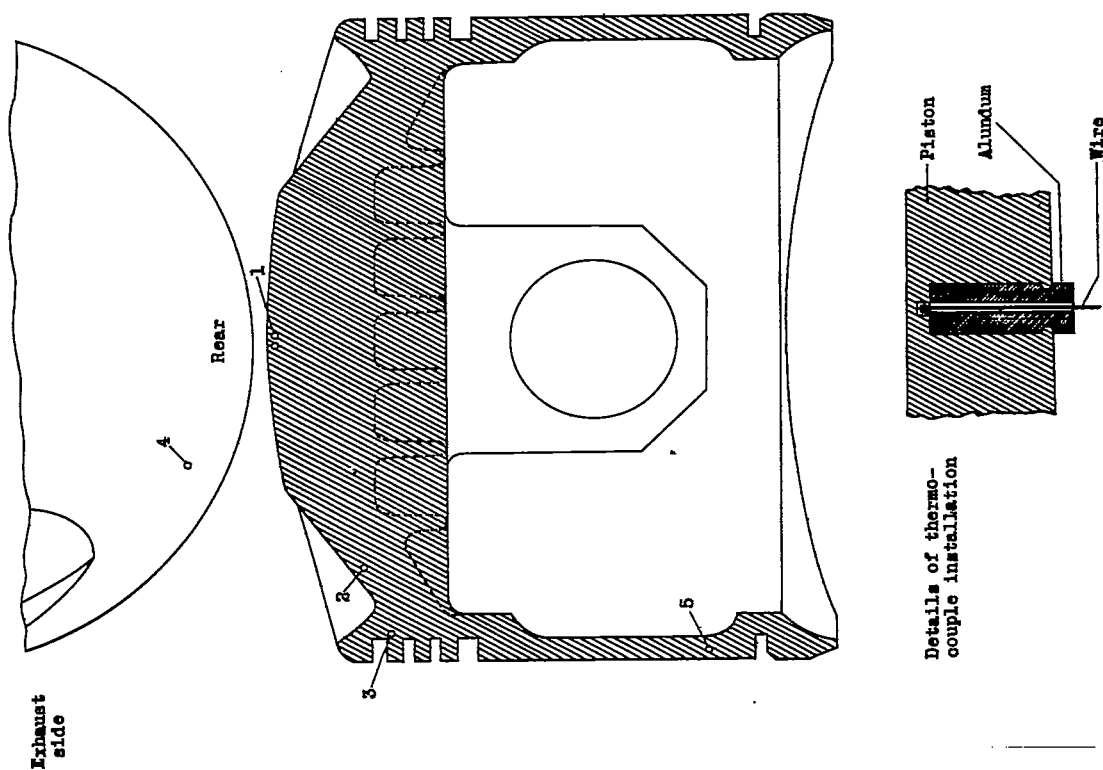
Location of thermocouples in piston of air-cooled engine.
